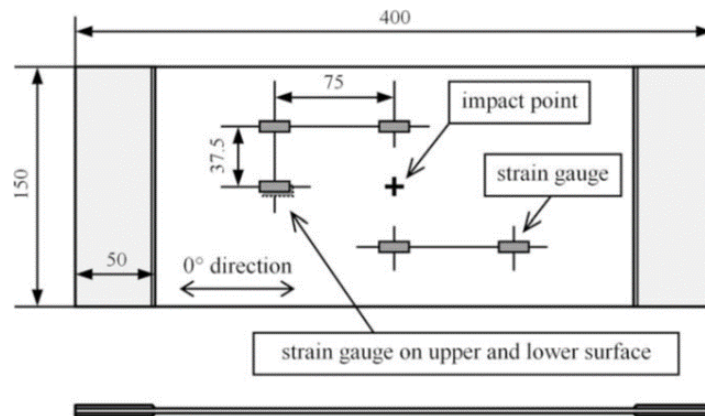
Dimension of specimens (dimensions are in mm) [53].
